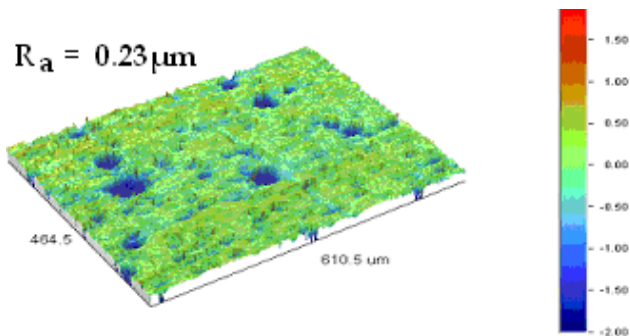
(a): The three dimensional view of ground (SiC wheel polished) plate surface.
